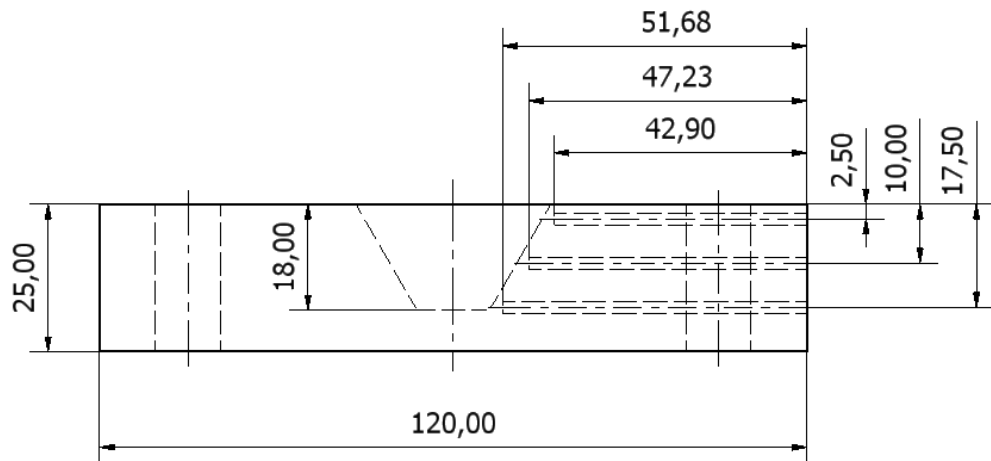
Thermocouple Hole Depths for Welds TW-23 and TW-24
